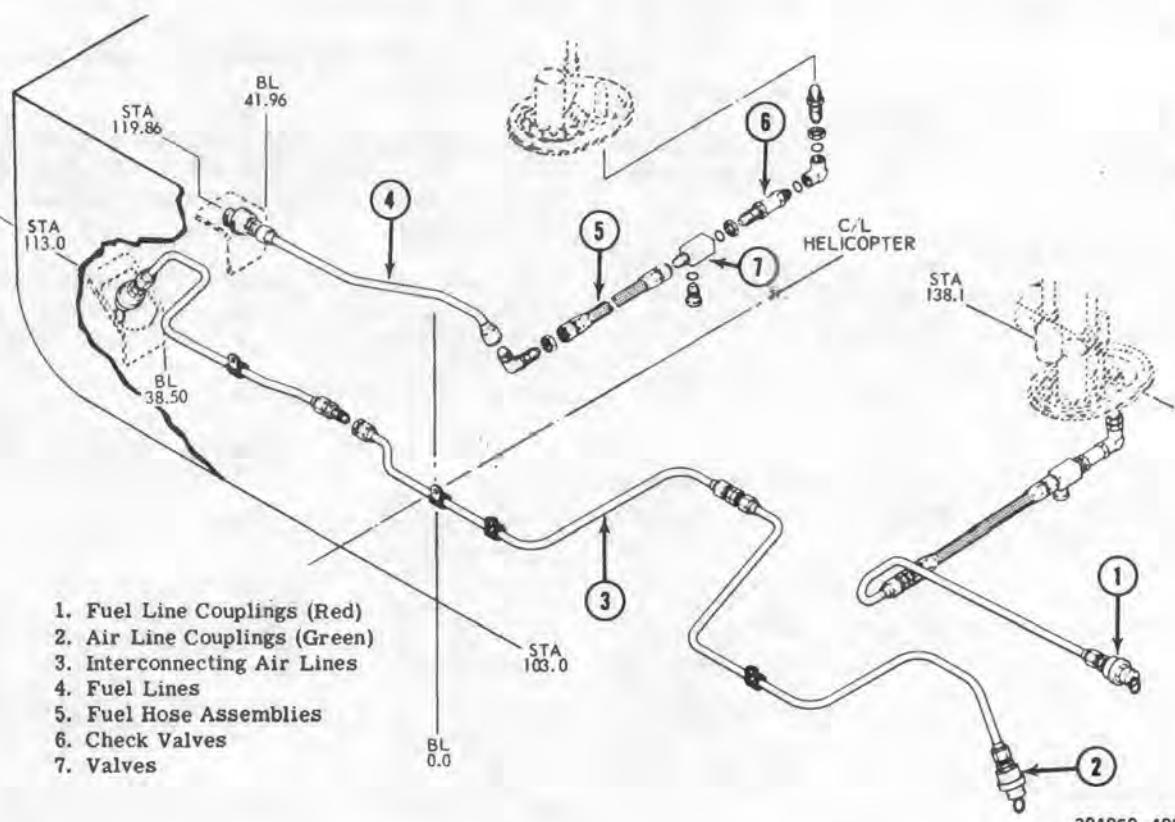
Permanently installed fuel lines — external auxiliary tanks (typical — UH-1B serial No. 62-1872 and subsequent)
